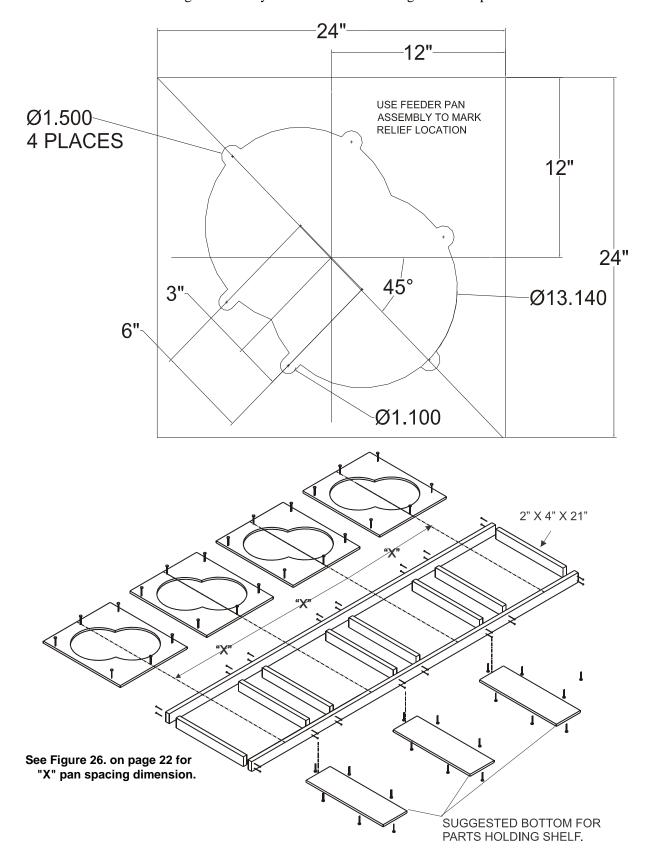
Feeder Pan and Tube Assembly Fixture Construction
